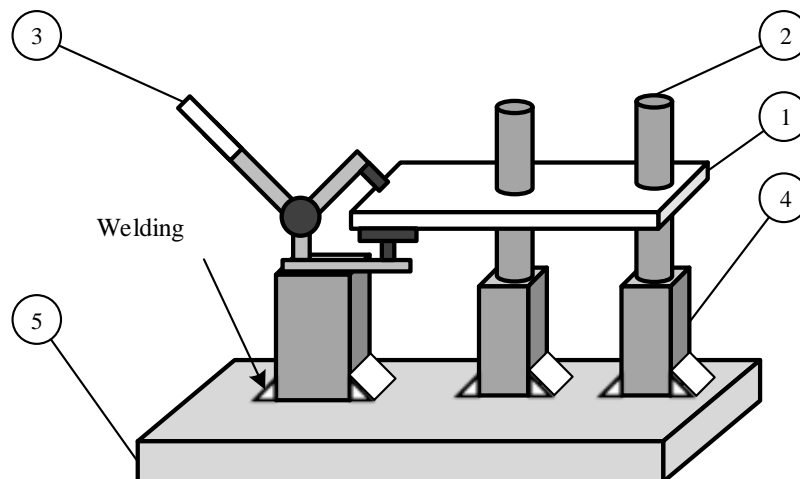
A dedicated welded fixture with: (1) workpiece, (2) locator or unit, (3) clamp, (4) fixture body and (5) frame.
